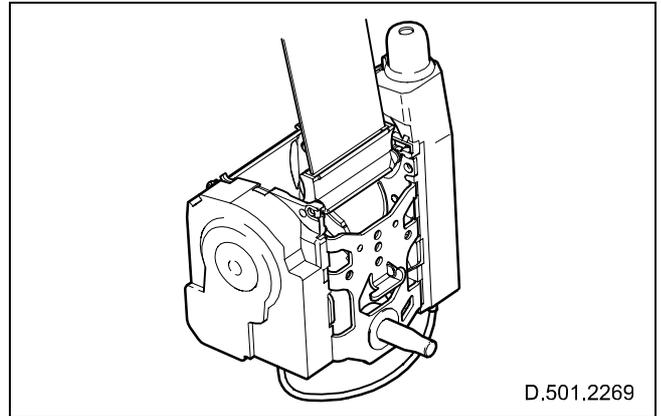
Retractor-type pre-tensioner (rear left-hand)
